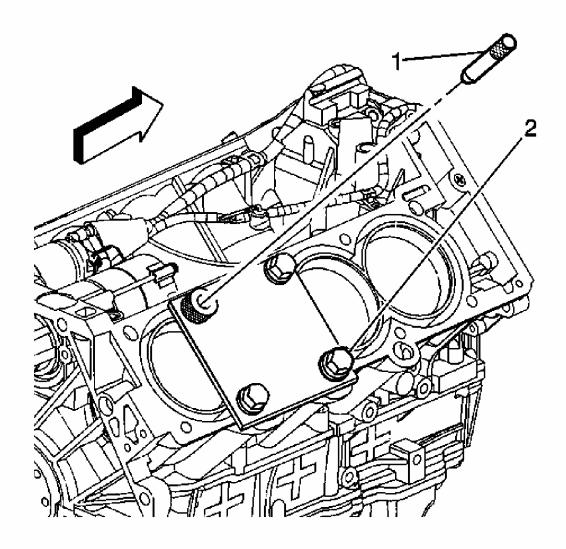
Identifying Alignment Pin & Fixture Retaining Bolts Courtesy of GENERAL MOTORS CORP.
